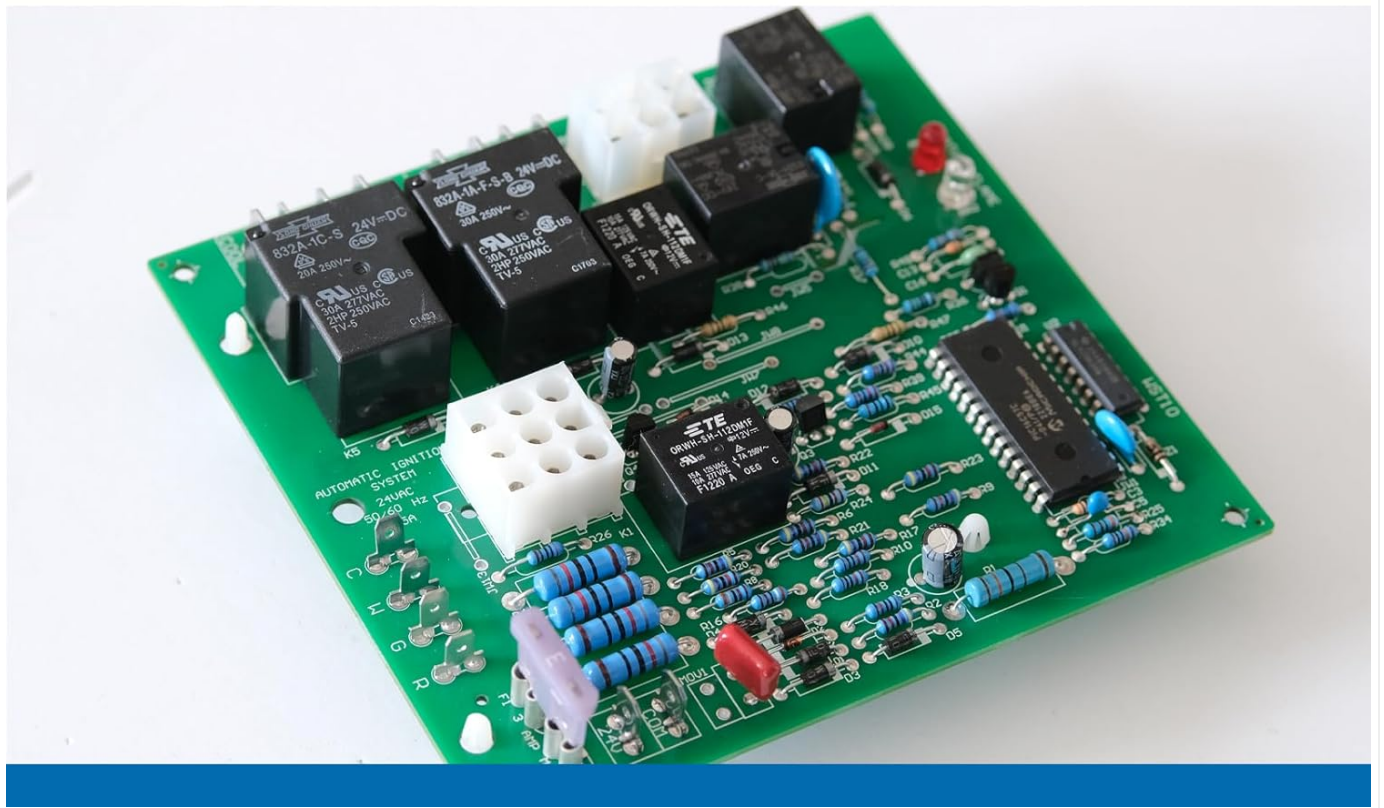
Front view of the NEALMART 903429 furnace control circuit board, showing various components and connectors.
